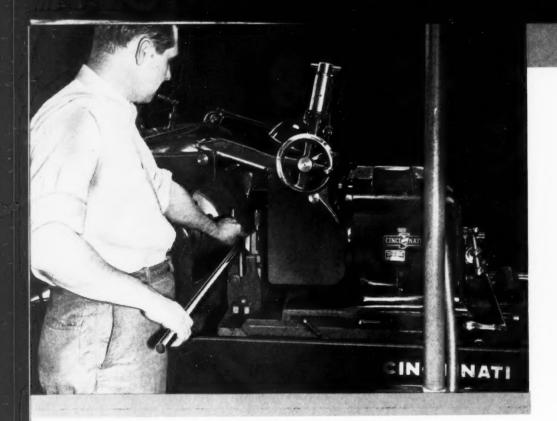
Long Slender Tubes that have been Previously Cross-drilled are Finished Externally in a Centerless Grinding Machine as Here Illustrated
